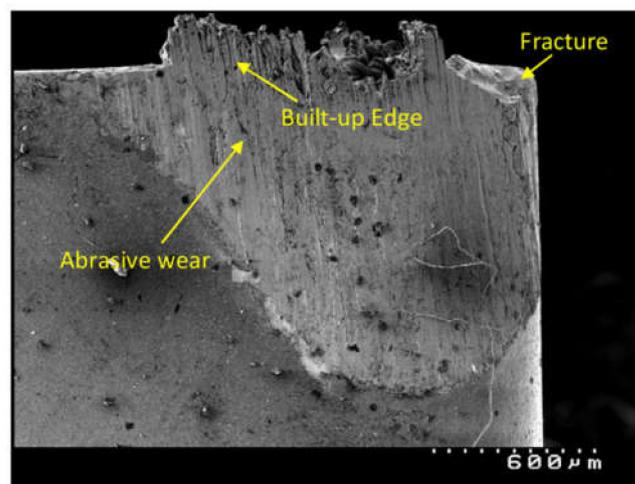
Flank wear of TiAlN-coated WC turning tool at 100 m of cutting distance used in machining Inconel 713C, presented by Kurniawan et al. [79].
